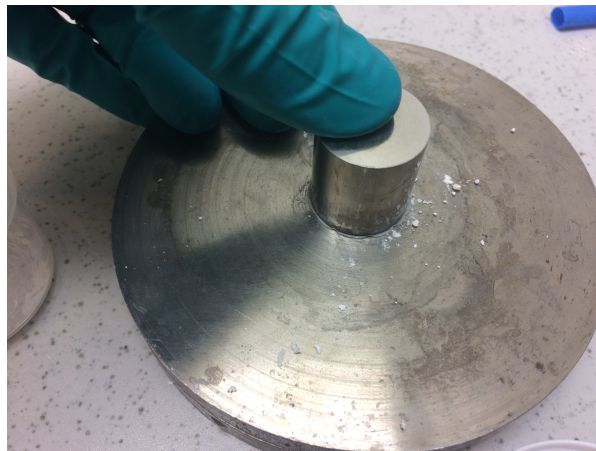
Hardened steel plunger being press fit into the mold by hand
